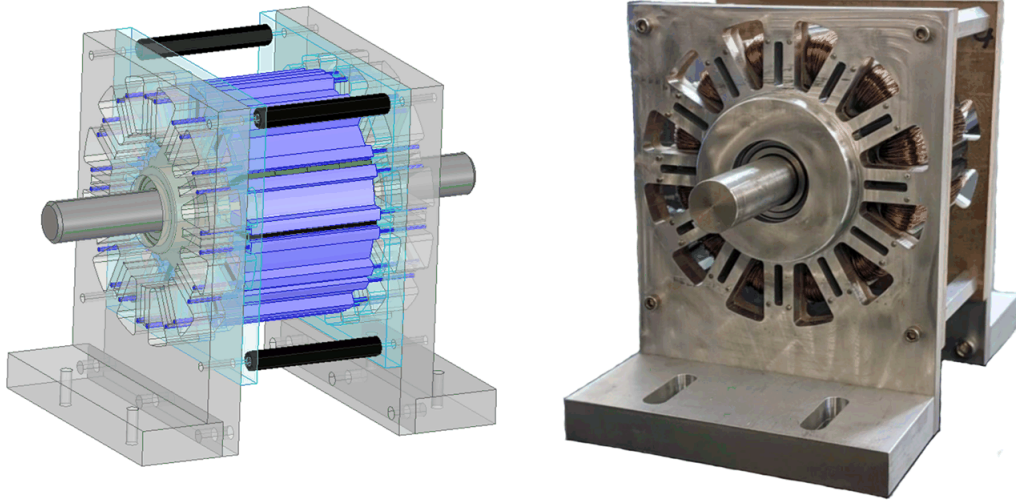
The CAD drawing and photo of the full assembly for the open frame lab prototype motor. Dowel pins were used in the laminated stator segments. PMs were segmented in both radial and axial directions to reduce the PM eddy current losses. All the coil terminals have been brought out for detailed testing purpose.
